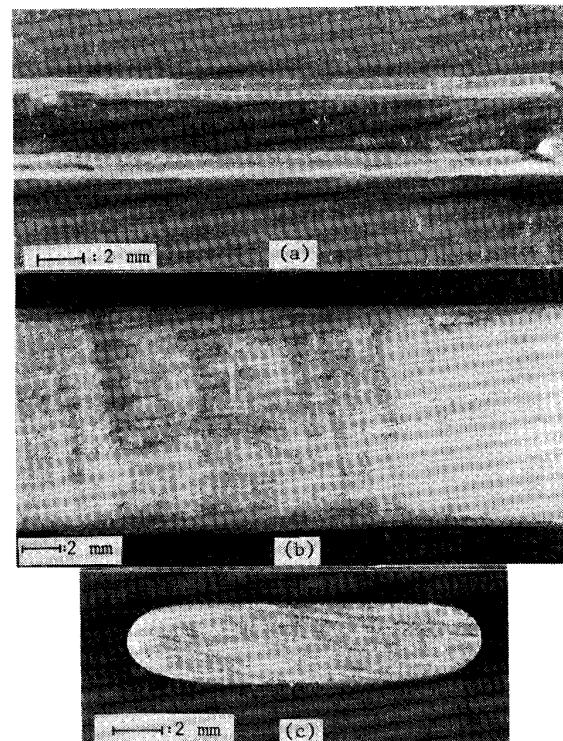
Magnified view of (a) rod, (b) thin plate and (c) cross-section of the thin plate cast by the horizontal electromagnetic casting process given in Fig. 7.
